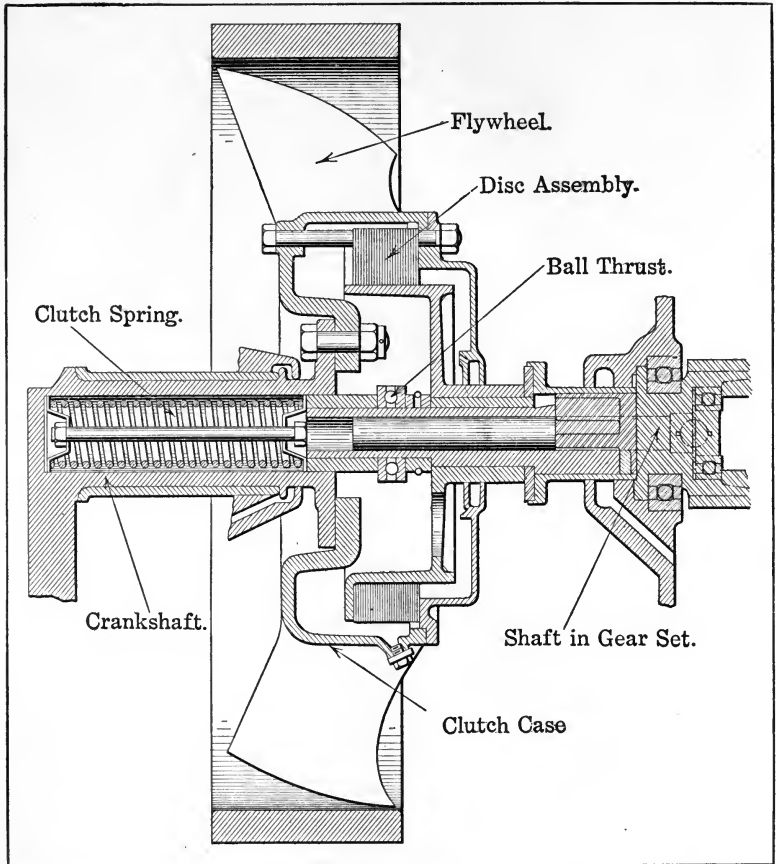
Typical Multiple-Disk Clutch Assembly. The Form Illustrated is Used on Some of the Hudson Cars.
